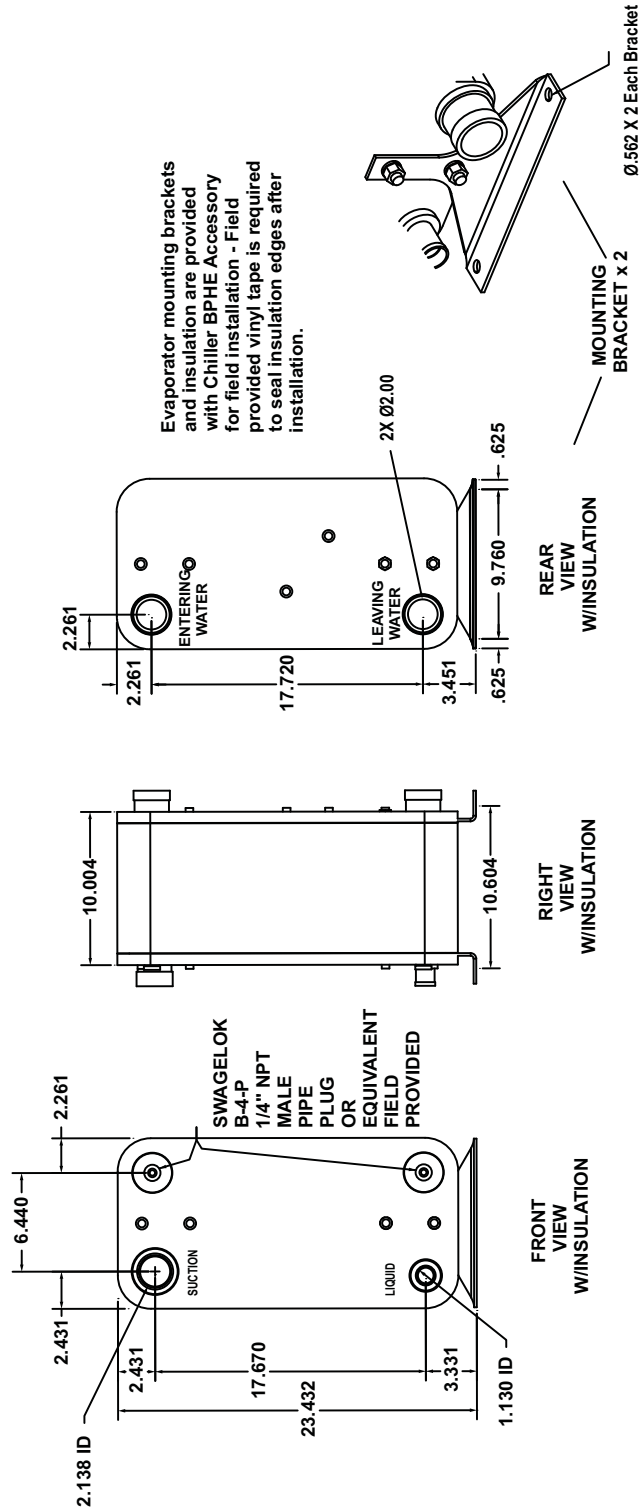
BPHE 25 Evaporator Chiller Dimensions
